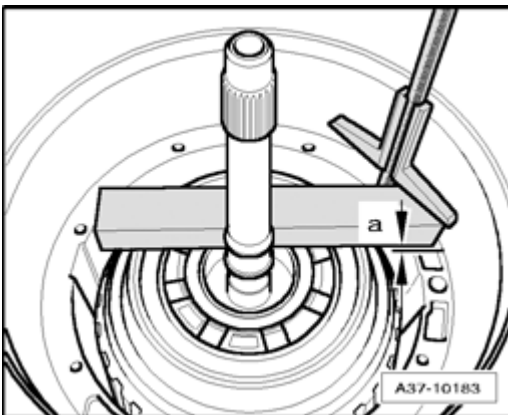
Measuring Projection Of Upper Edge Of Tower "II" To Contact Surface For ATF Pump
